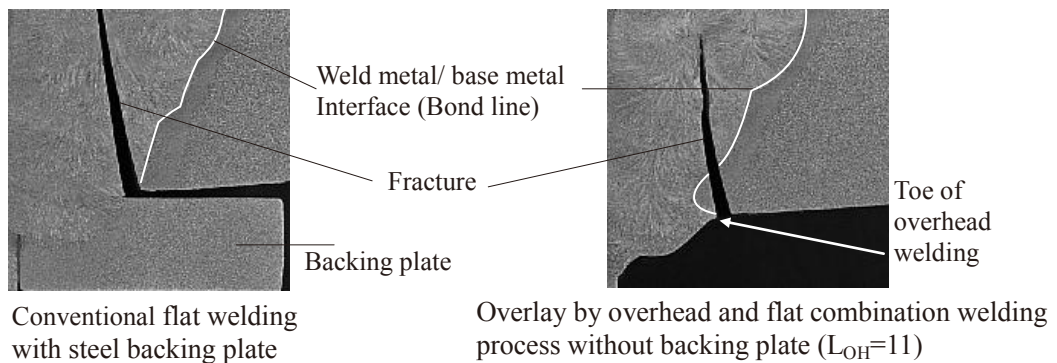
Typical fatigue fracture of conventional and developed process
